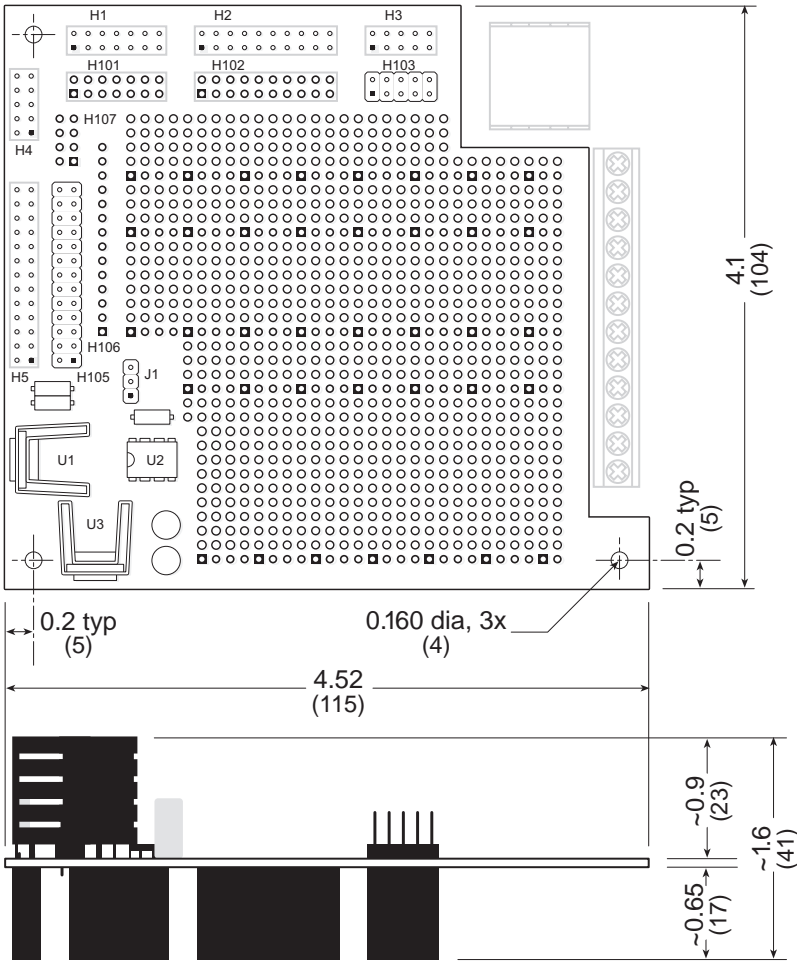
BL1600 Prototyping Board Dimensions and Layout
